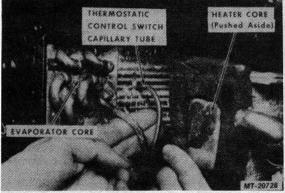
Withdrawing Thermostatic Control Switch Capillary Tube from Evaporator Core
